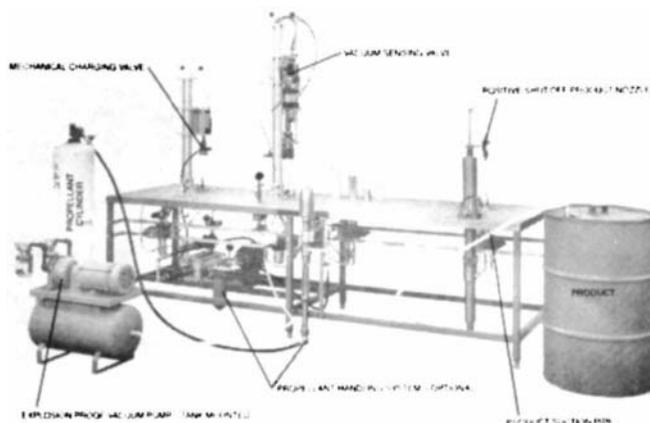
Terco Inc. Hand Operated Filling Machine with Production Heads
